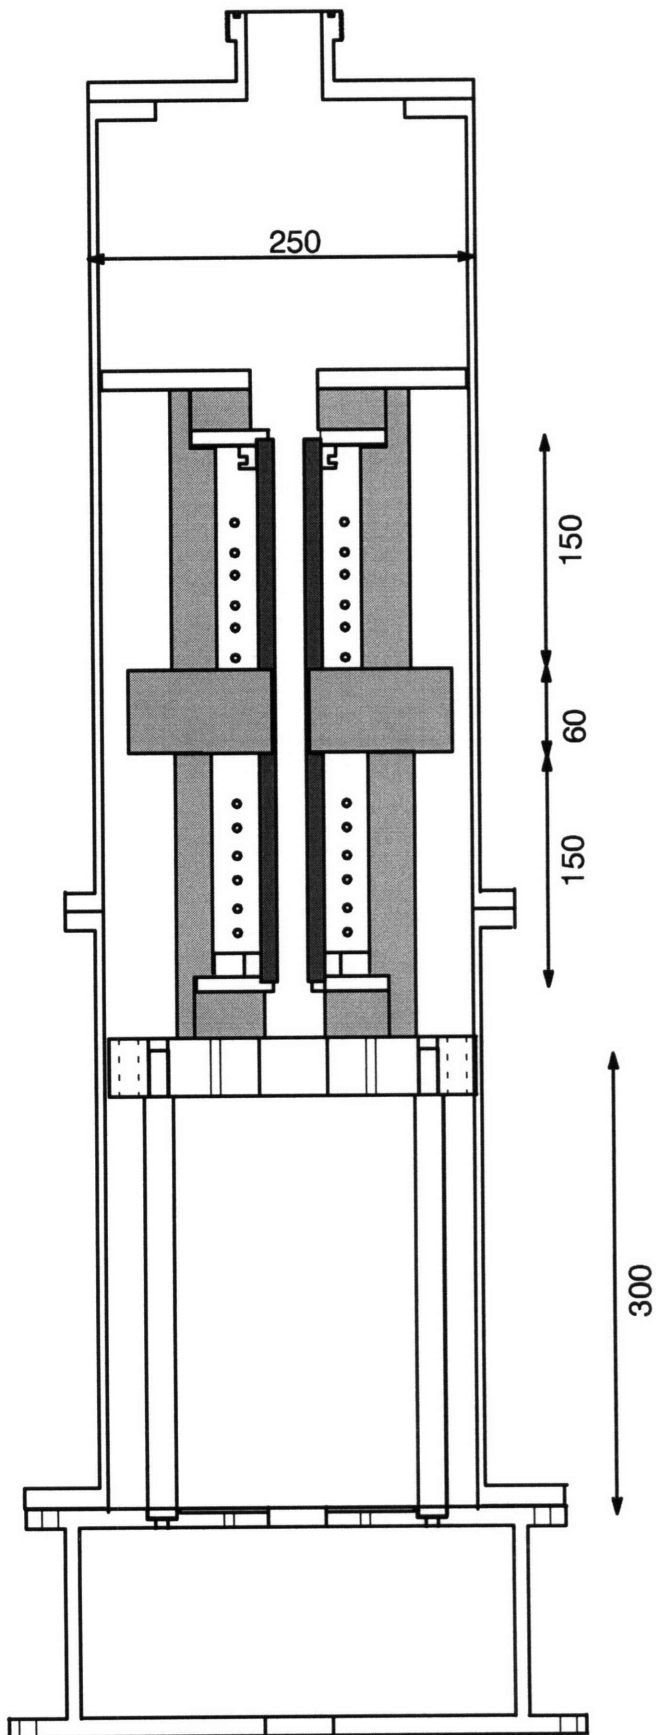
Scale drawing of the furnace (dimensions in mm).
